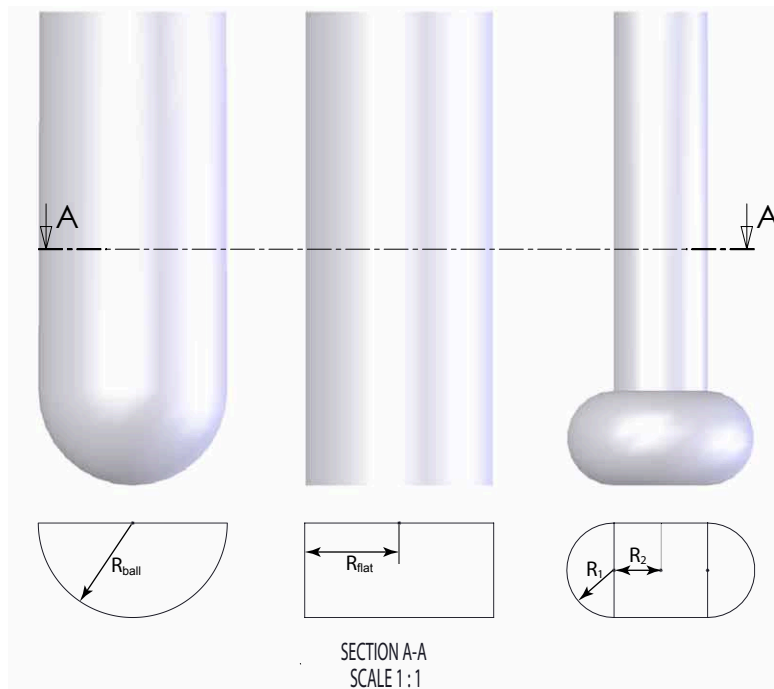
Geometry of Ball nose, Flat and Radiused End Milling Cutters
